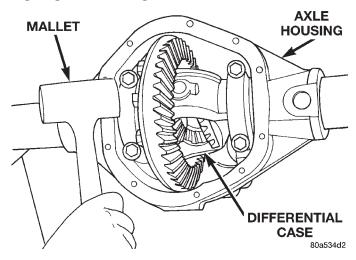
Seat Pinion Gear Side Differential Dummy Side Bearing
